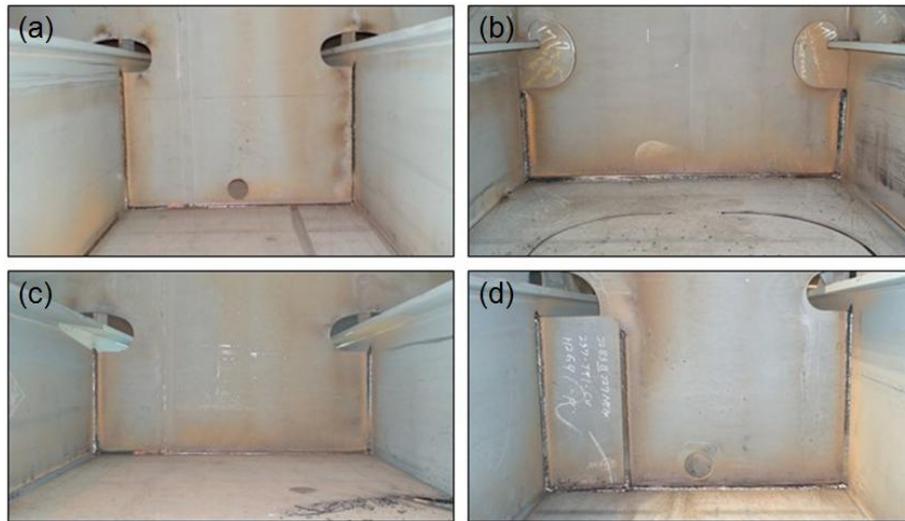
Various types of welding targets that RRX3 successfully welds
